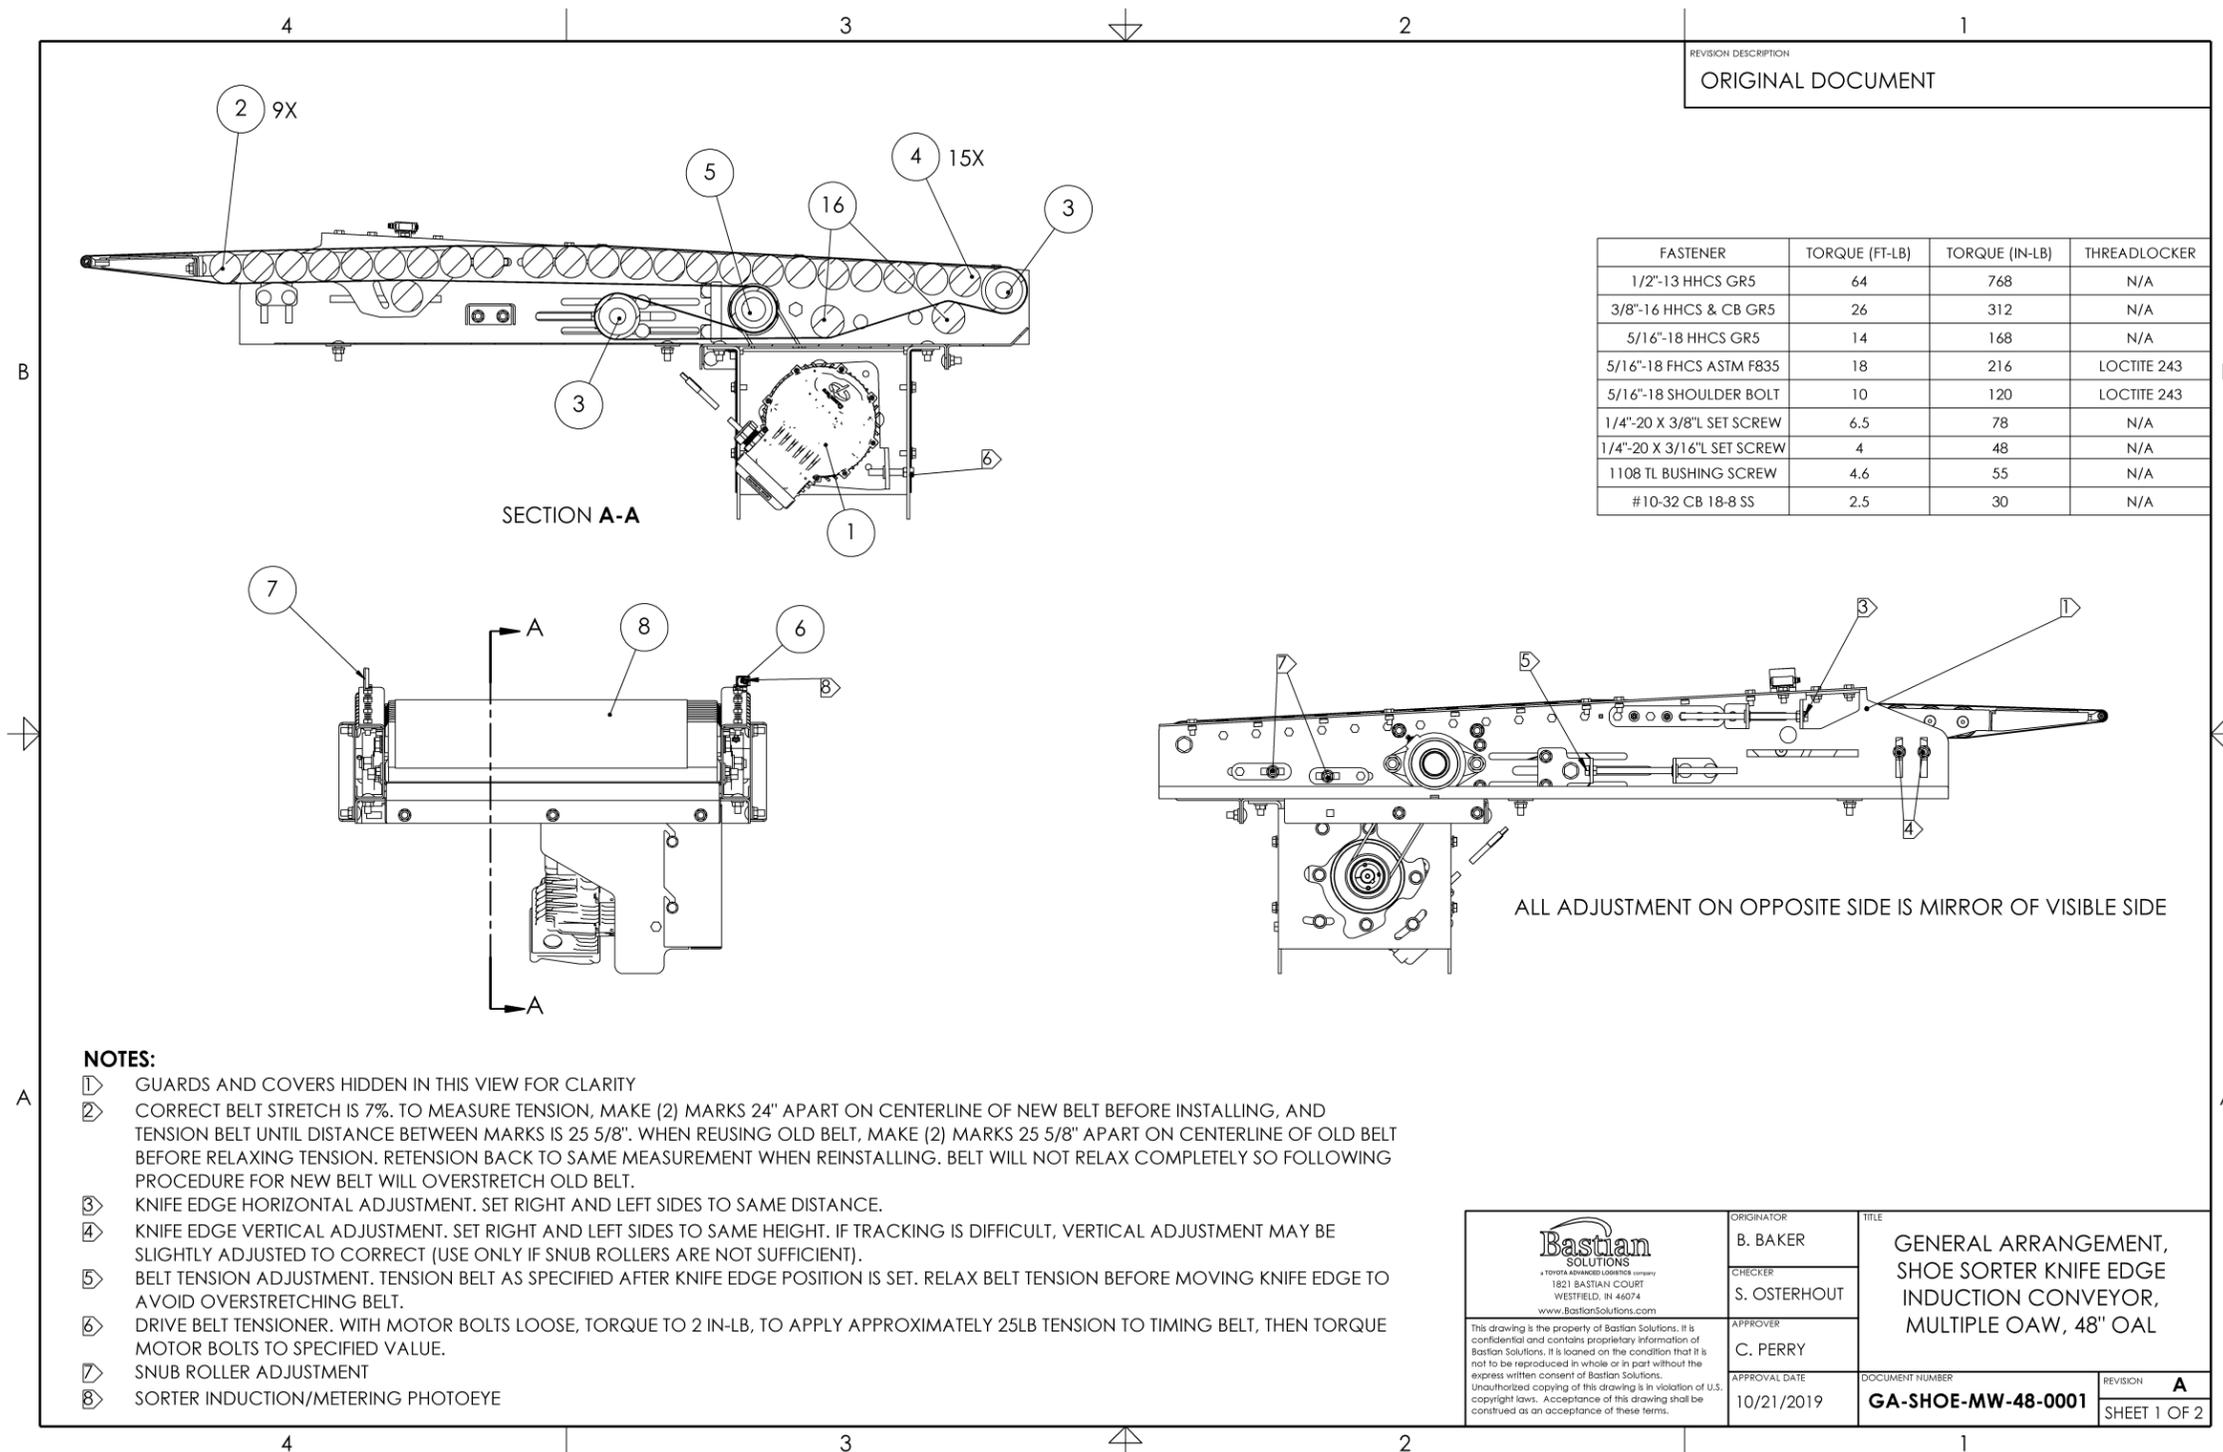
General Arrangement, Shoe Sorter Knife Edge, Sheet 1 of 2
